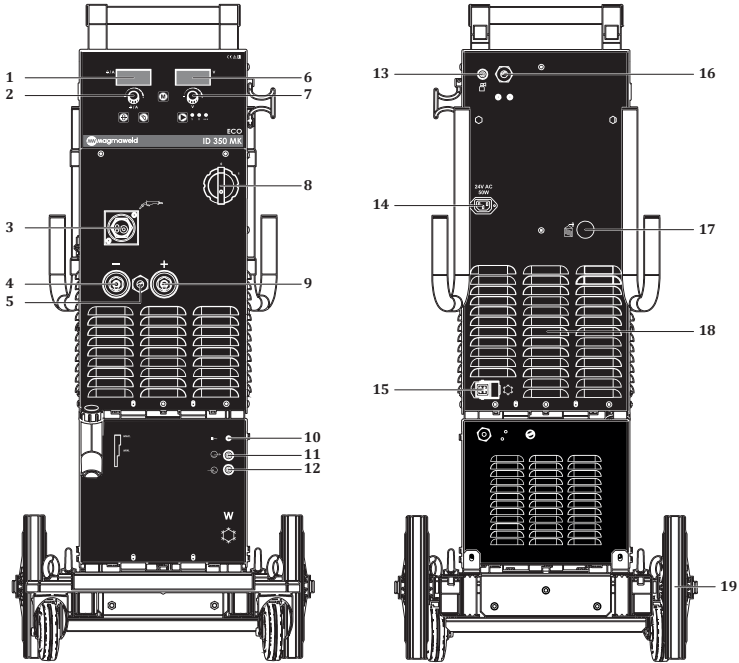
ID 250 - 350 MKW ECO Front and Rear View
